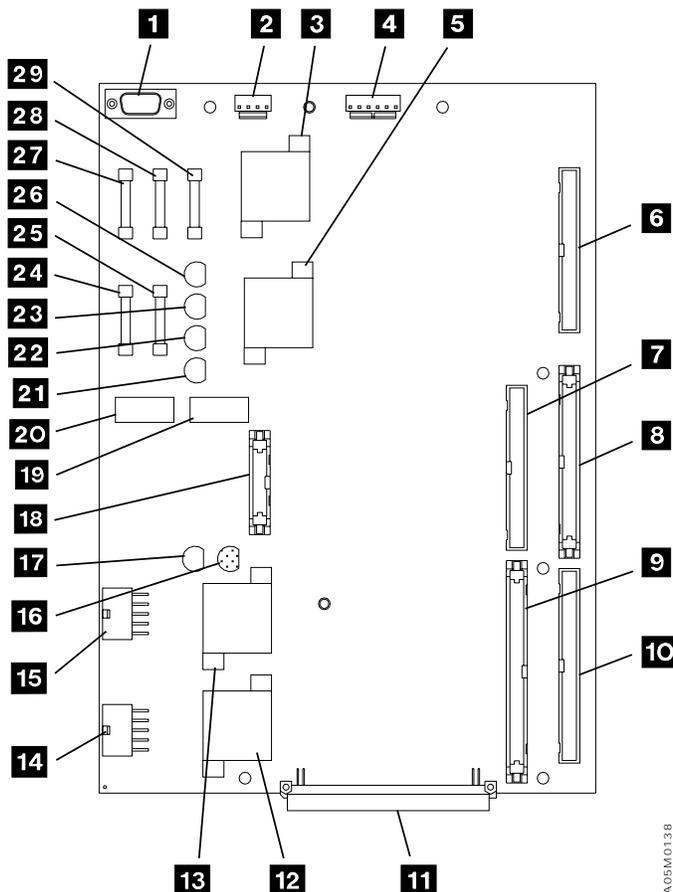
Machine Interface Control Card 2-4 (MIC2-4)
